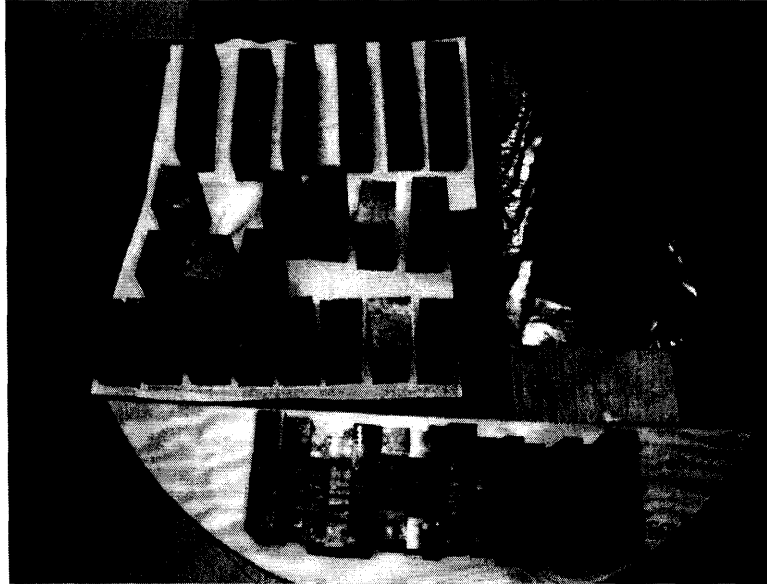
Sample Blanks Cut from the Pipe and Plate Welds
